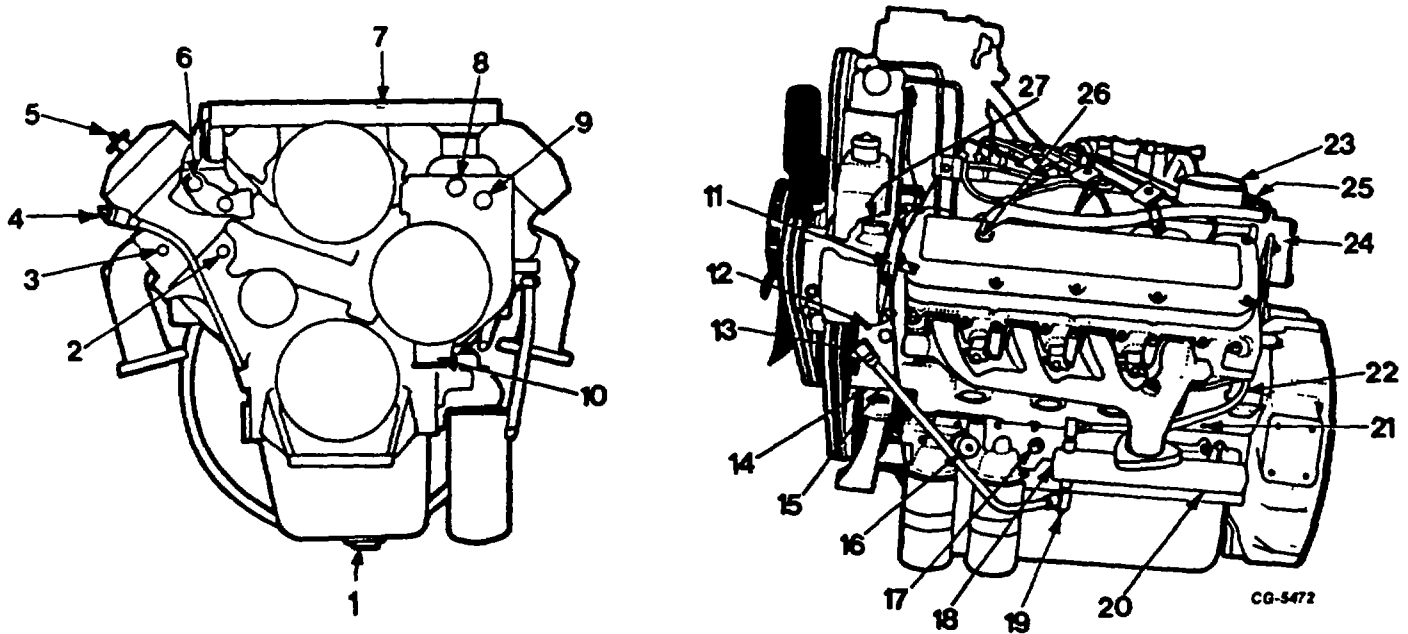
Engine Showing Coolant, Oil and Air Connecting Location
